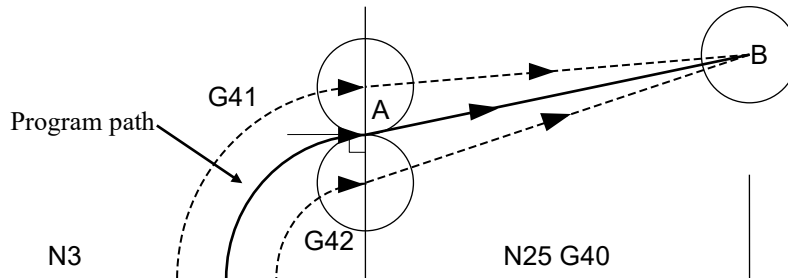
Cancel of Tool-tip Radius Compensation - 2
